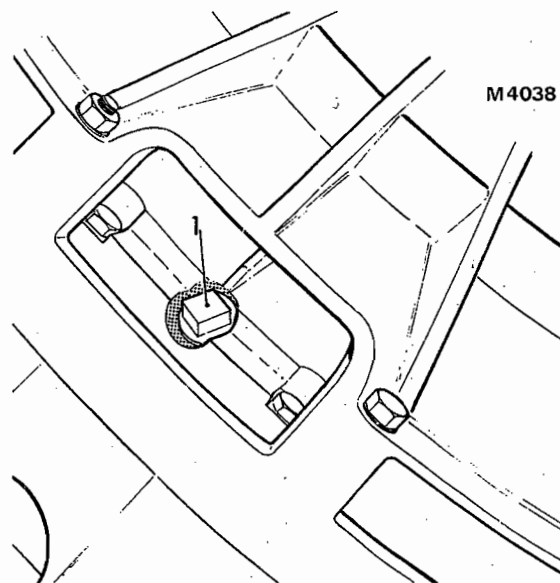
CLUTCH DRAIN PLUG THROUGH BOTTOM APERTURE
